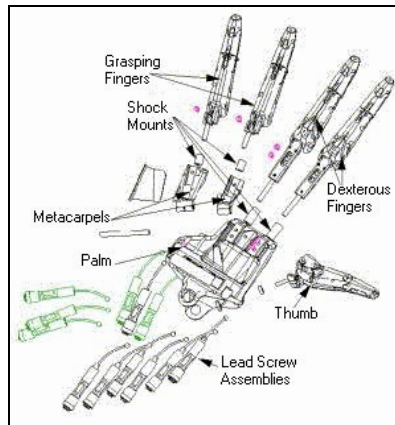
Robonaut hand exploded diagram [Lovchik & Diftler, 1999]
